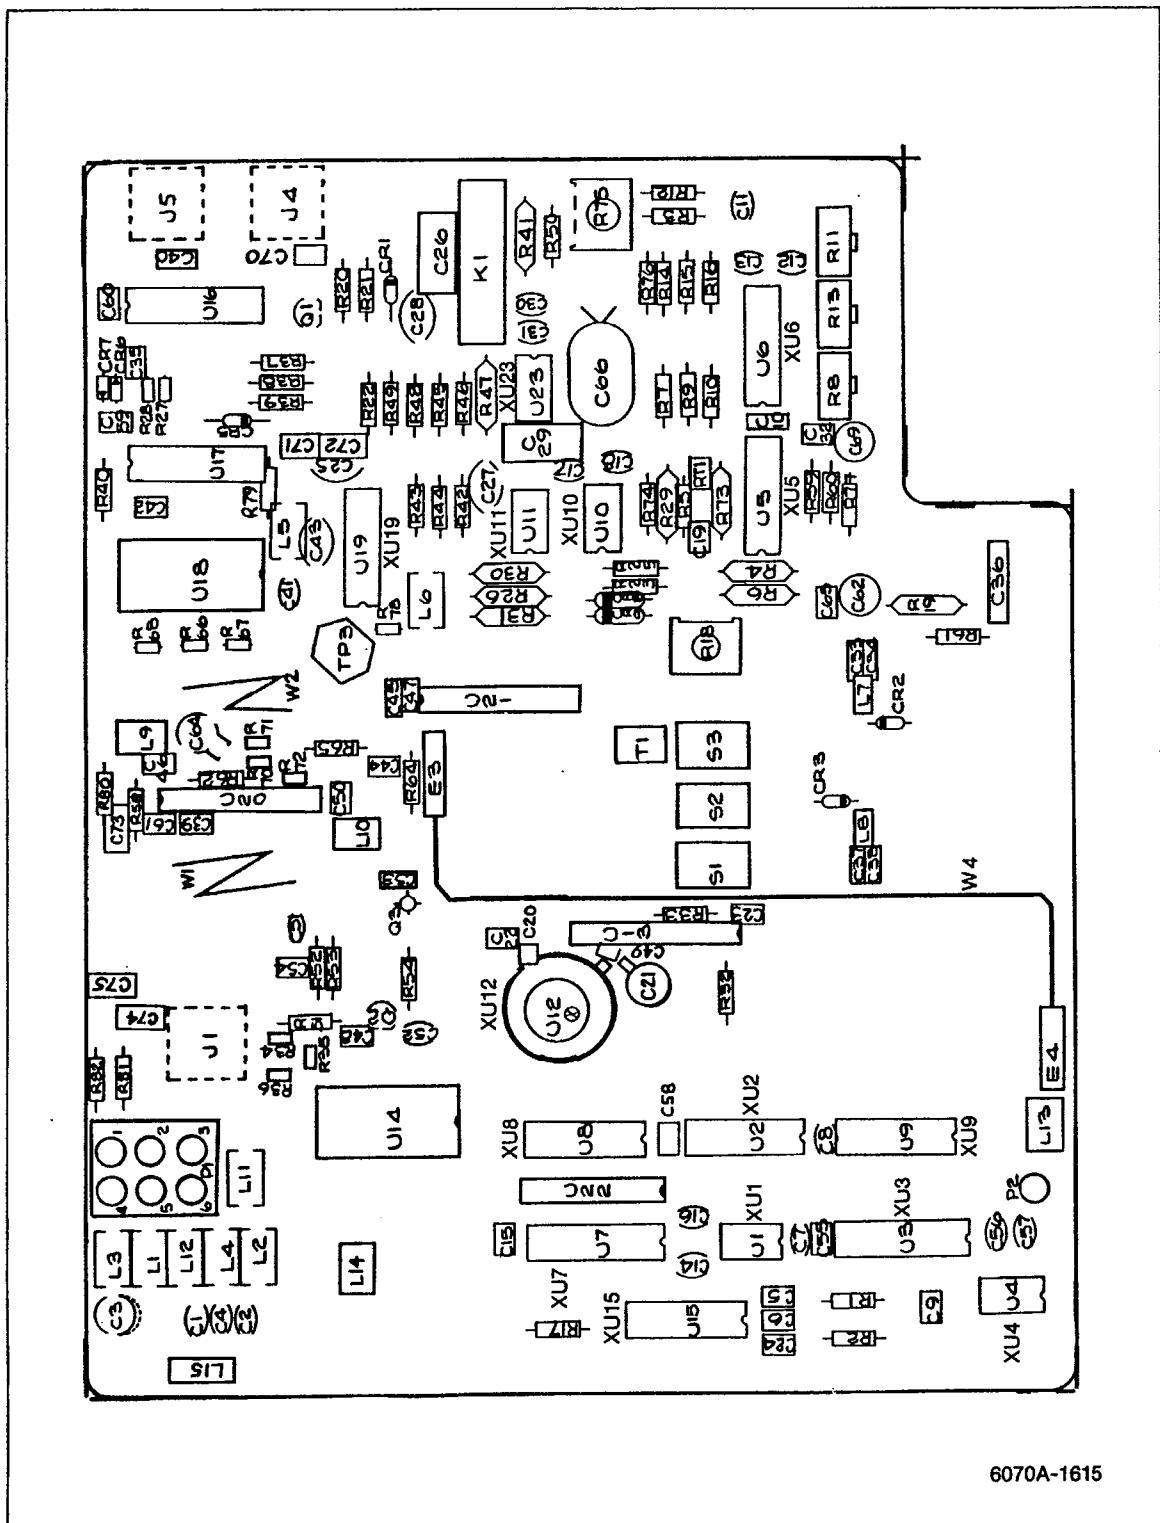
A4A8 Heterodyne Oscillator PCB Assembly
